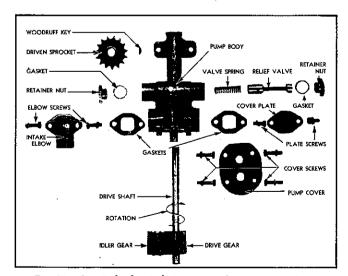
Six Cylinder Lubricating Oil Pump Details for RA, RB, RC, and RD Models.
